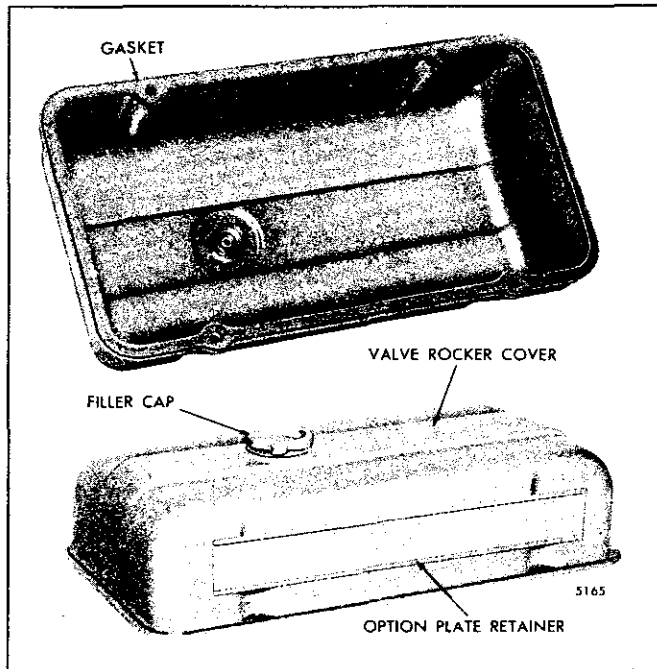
Typical Stamped Steel Valve Rocker Cover Assembly
